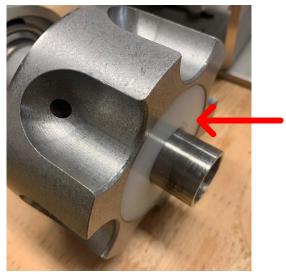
White plastic caps that can be removed from wheel for cleaning.
